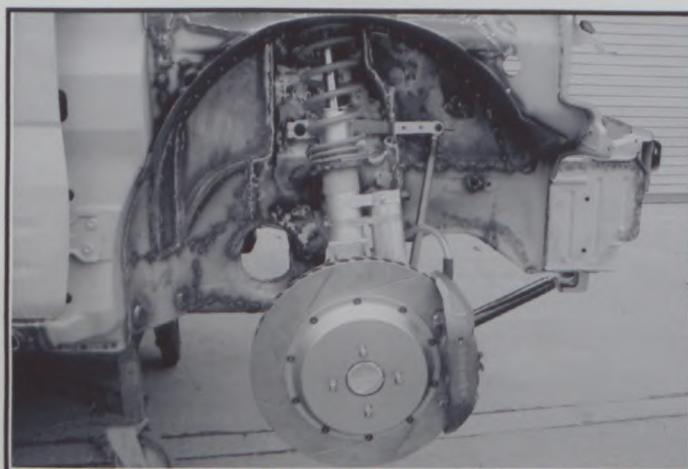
Front stabilizer mounted in ENG room
